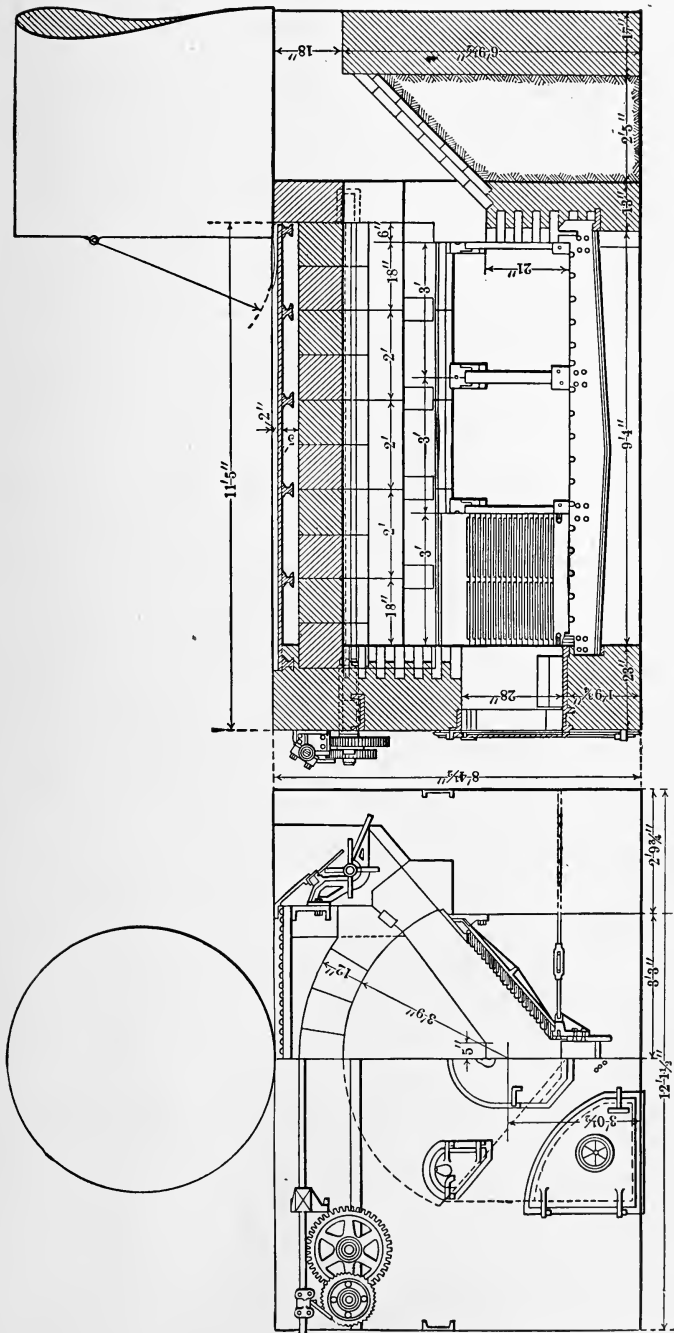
End and Side Sectional Elevation of the Myers Tanbark Furnace.
